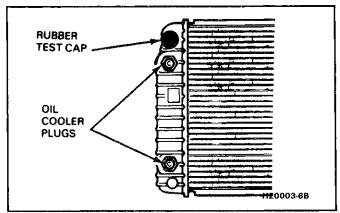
Aluminum Radiator and Oil Cooler Plugs
